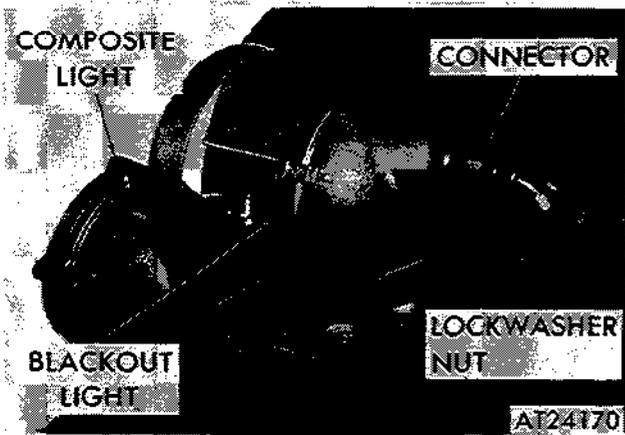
Removing or installing blackout headlamp on M151A2, M825, and M716A1 vehicles.
